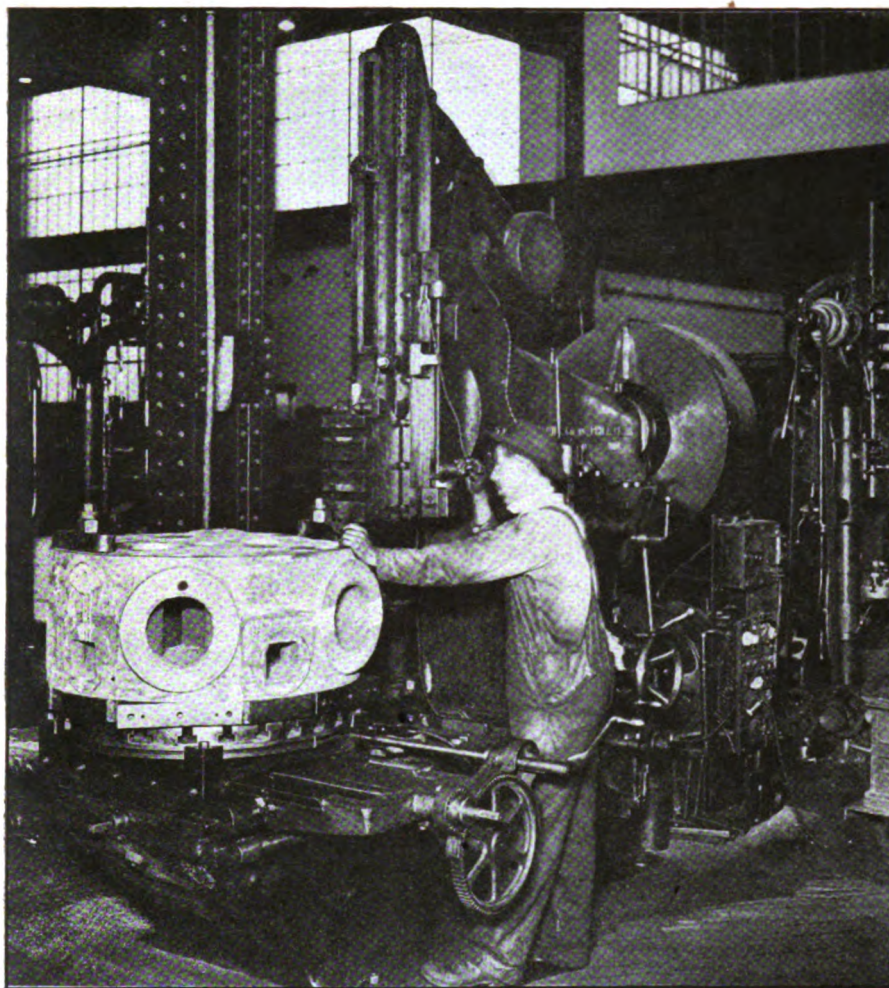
PLANING THE SIDES OF A CYLINDER HEAD ON THE SLOTTER
